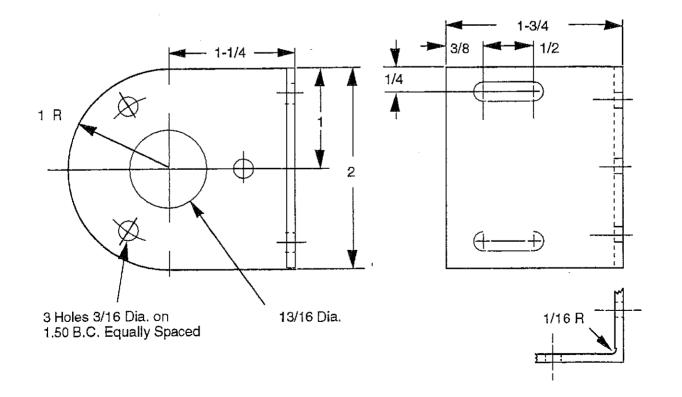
MCS-605-1/TCS-605-5 Mounting Details
